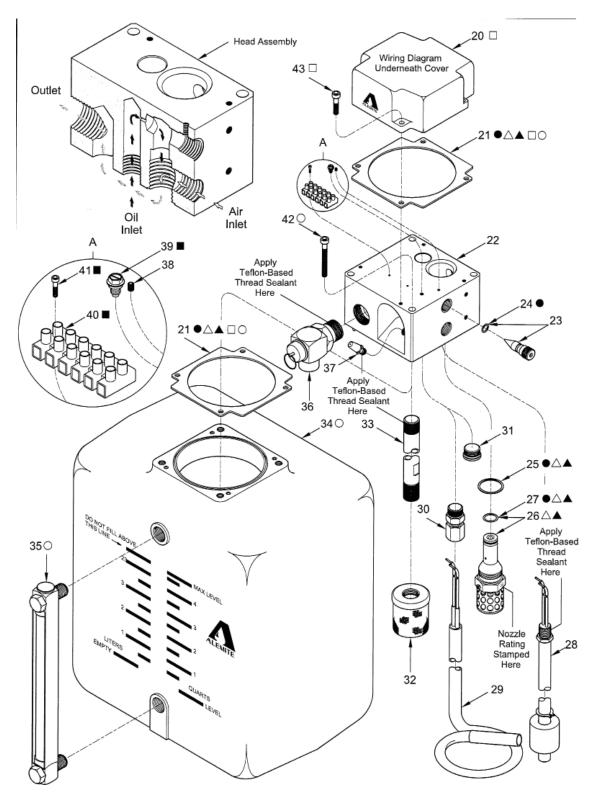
Lubricator Model 3942 and 3943 Series Plate Mounted Shown with Solenoid Valve
